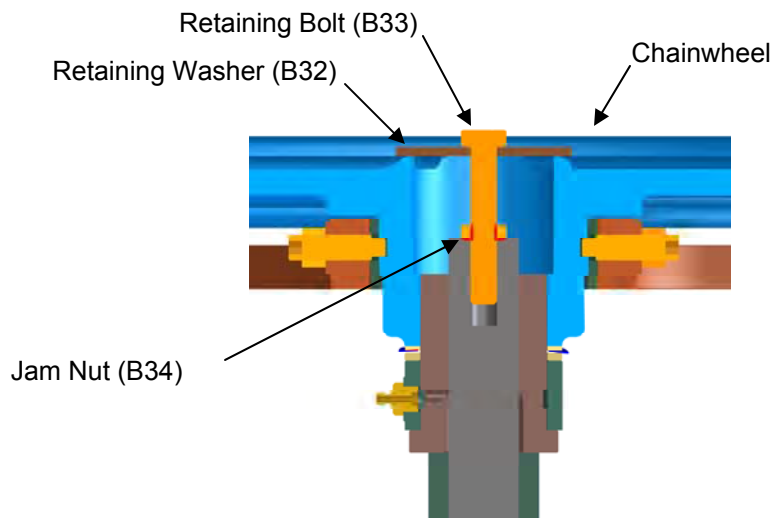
Detailed View of Chainwheel Retaining Components on 2-12" Valves
